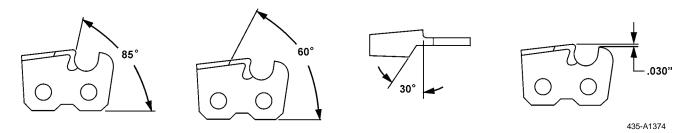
Side Plate Angle, Top Plate Cutting Angle, Top Plate Filing Angle, Depth Gauge Setting
